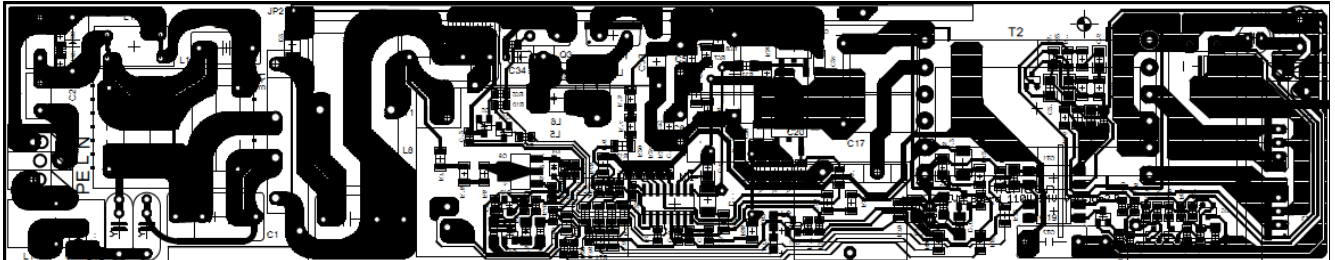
Layout of 110 W / 54 V Power Supply Demo Board (Bottom View)
